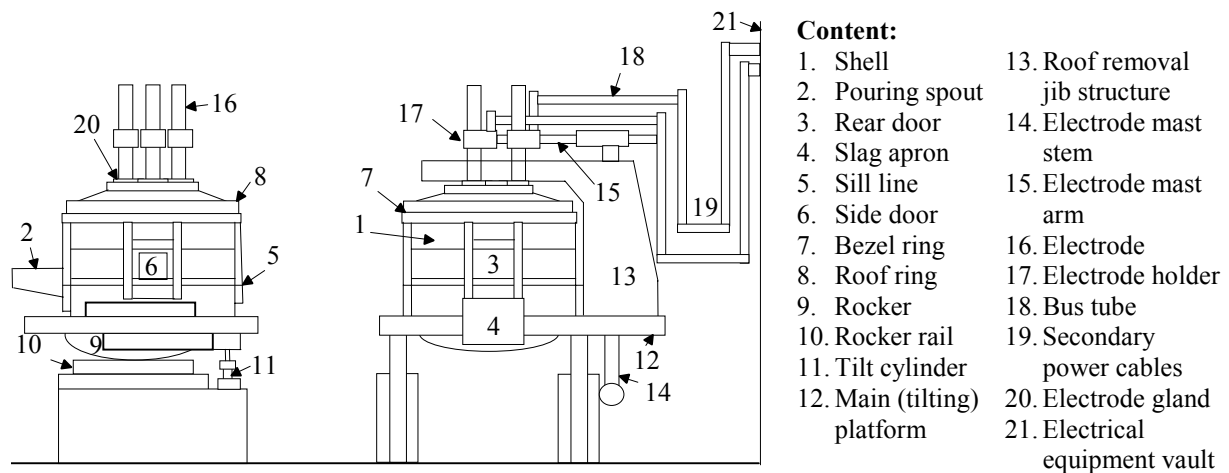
Drawing of a three-phase AC arc furnace [Jon98].
